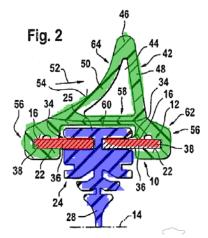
of the '823 patent depicts a cross-sectional view of a windshield wiper blade embodiment, with elastic rubber wiper strip 24 highlighted in blue, resilient support element 12 in red, and wind deflection strip 42 in
